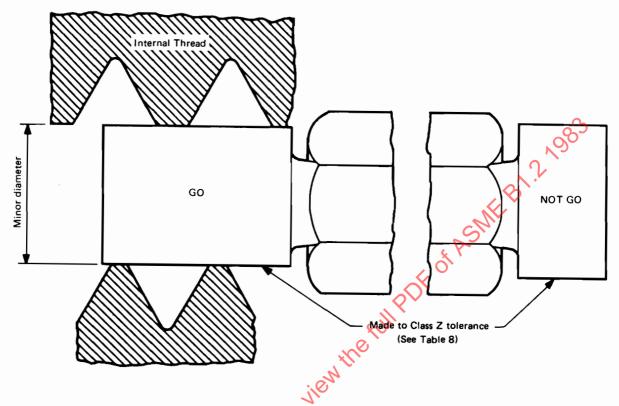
MINOR DIAMETER LIMIT — CYLINDRICAL PLUG GAGES
